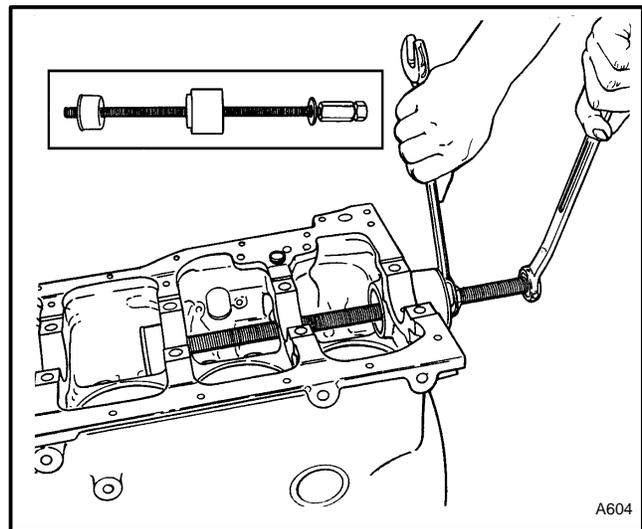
CAMSHAFT BEARINGS, REMOVAL AND INSTALLATION
